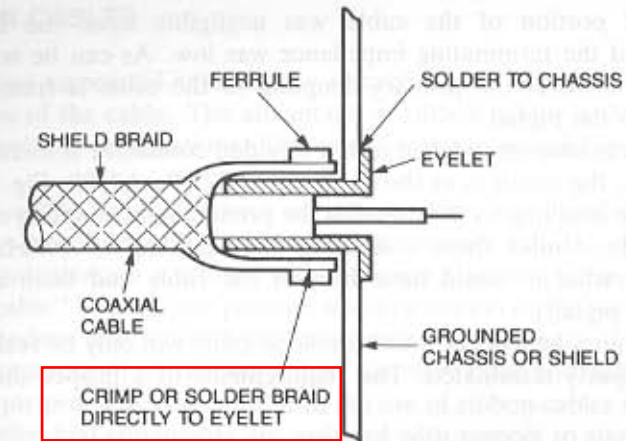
One method of terminating a cable with 360° contact to the shield.
